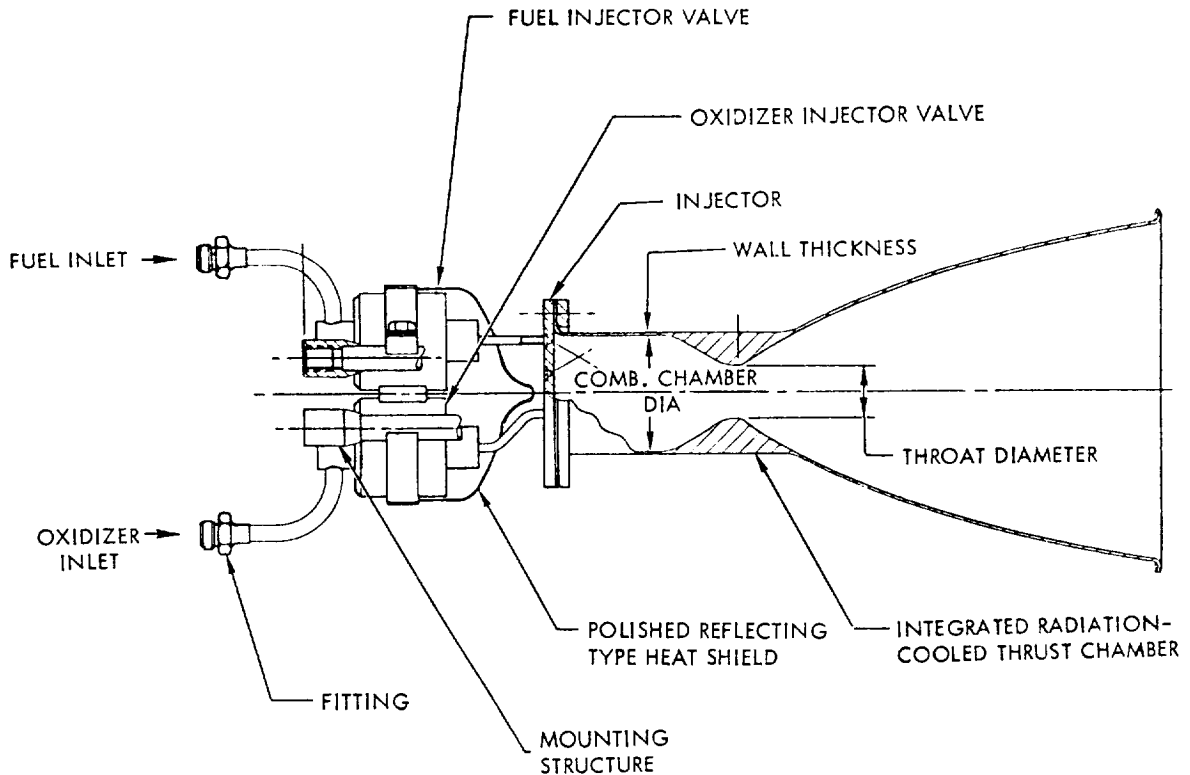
Typical total radiation-cooled reaction control thrust chamber assembly.
